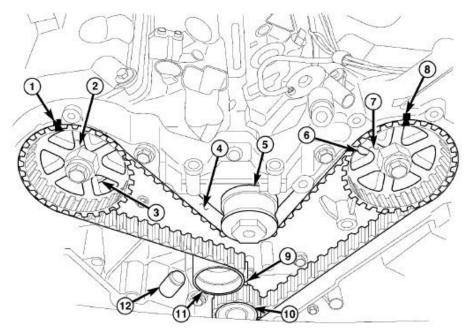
Timing Gear Components Courtesy of CHRYSLER LLC
